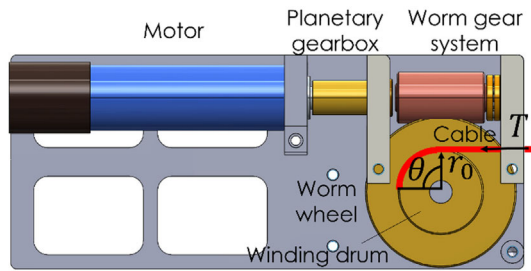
Design overview of the actuation system in the control unit, which includes a DC motor coupled with a planetary gearbox and a worm gear system. The worm gear system consists of a single-thread worm and a worm wheel with a cylindrical protrusion around which the cable is wound.
